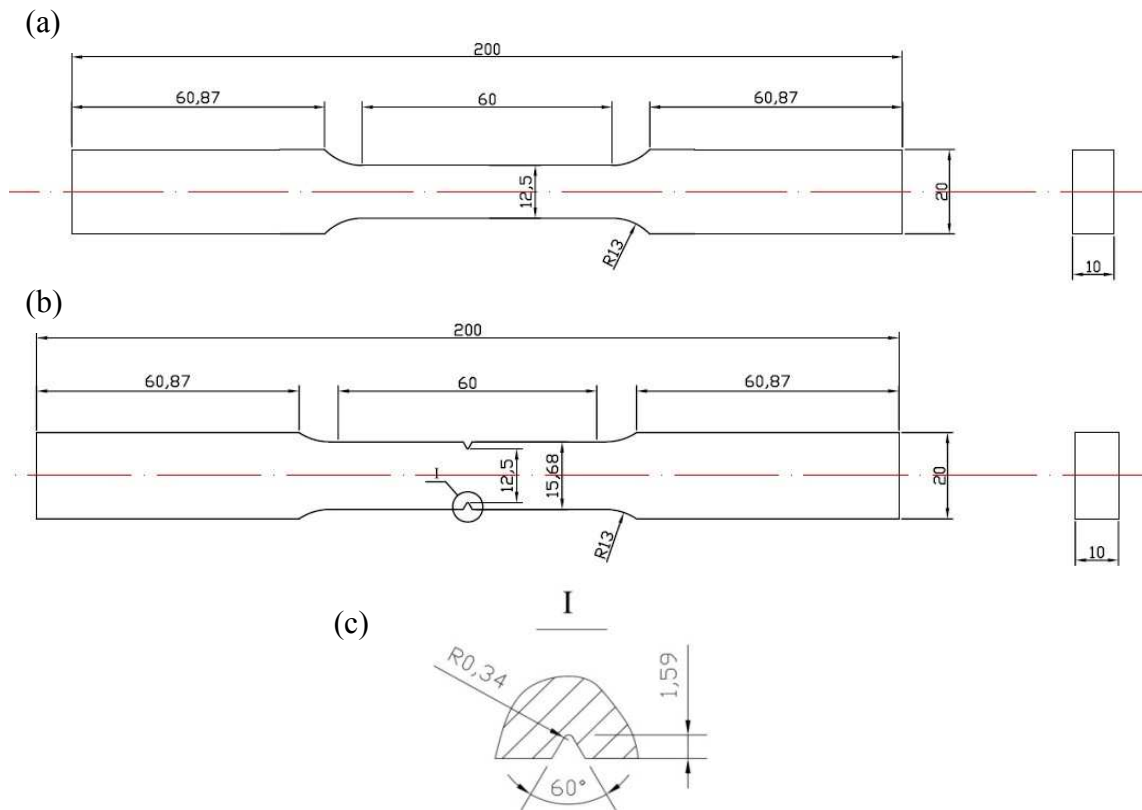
Tensile test specimens: (a) dimensions of unnotched for parent and welded metals, (b) dimensions of notched for parent metal only, and (c) dimensions of V-notch. (All dimensions in mm)
